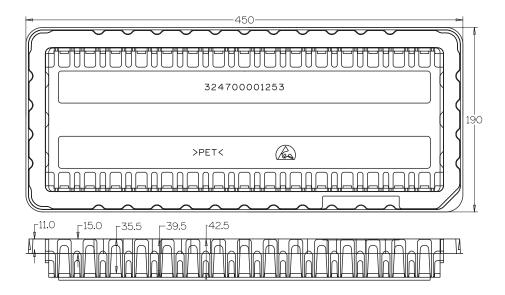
Tray base dimensions for L2T0-xxxx012M00000.
